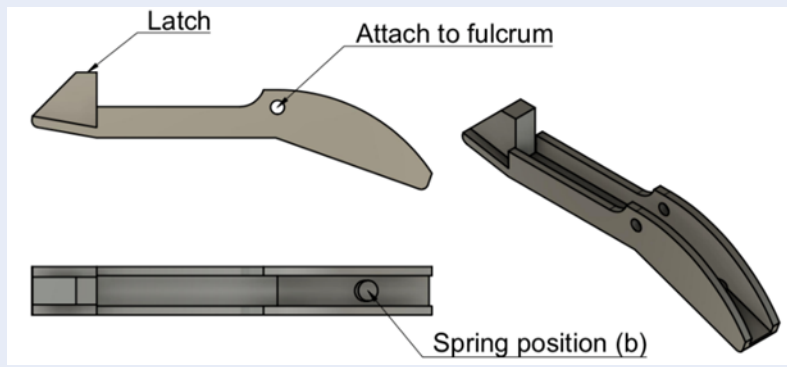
Front, Top, and Perspective views to illustrate the structural design of the trigger with latch, position to attach to the fulcrum, and spring position (b). A 5 mm diameter, 15 mm free length spring links the main body and trigger spring positions (b).
